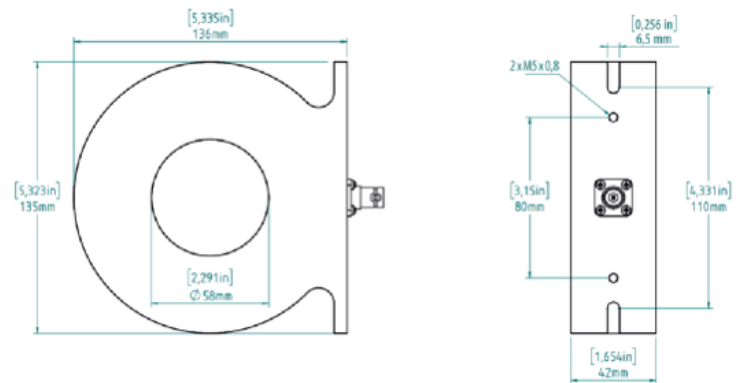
PMK LILCO®-Series 89 Mechanical Dimensions
